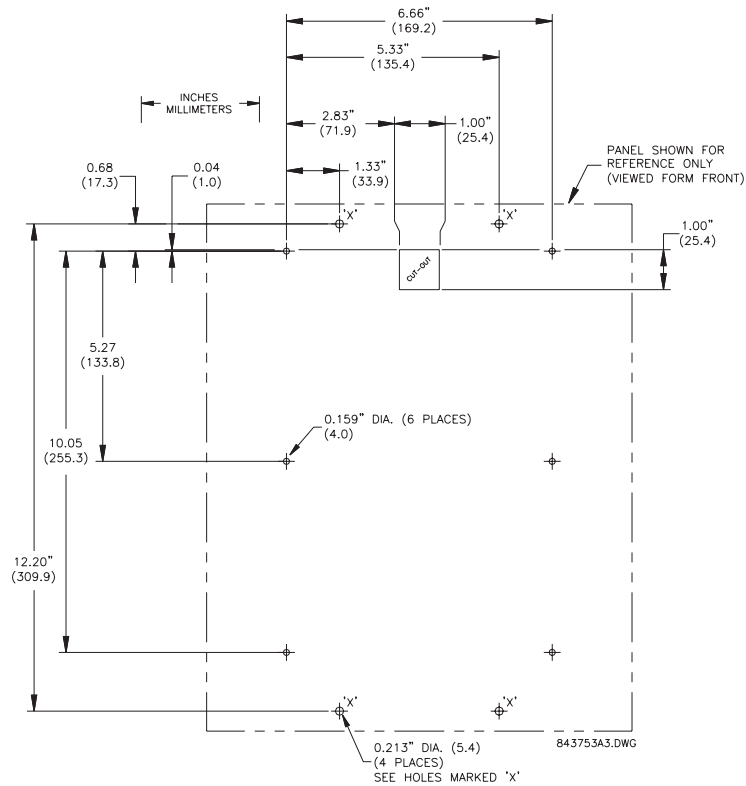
L90 VERTICAL SIDE MOUNTING REAR DIMENSIONS
